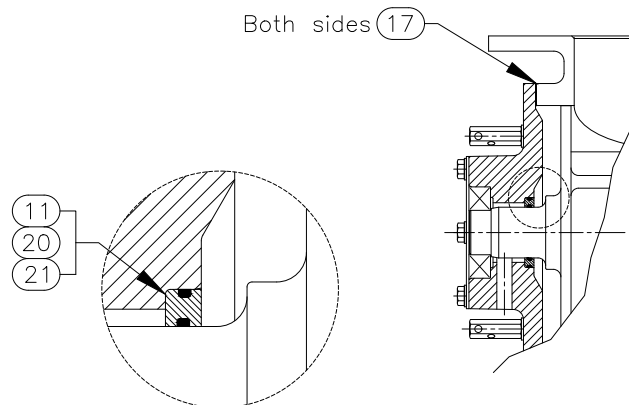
Dismantling shaft seal for cleaning GPD Dairy-WD
